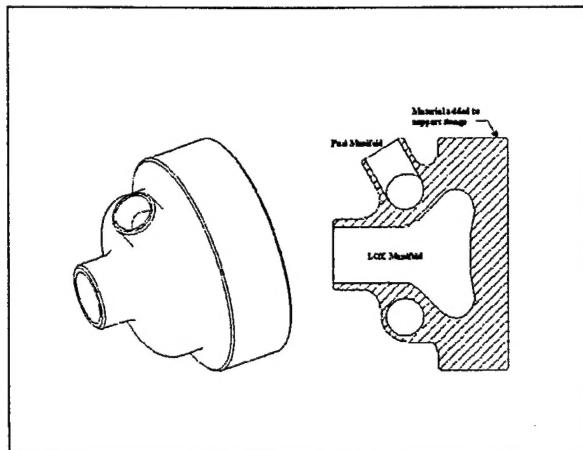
Three Dimensional Computer Model for Fabrication of the Direct Metal Injector Body
